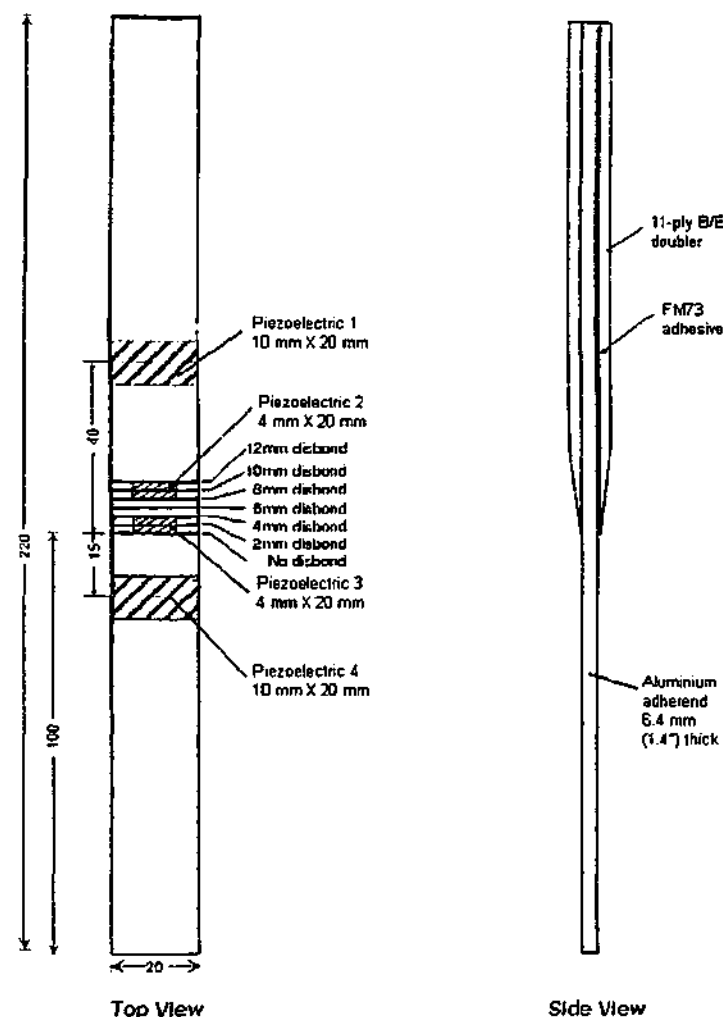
Schematic drawing of the specimen with sensor/actuator bonded
